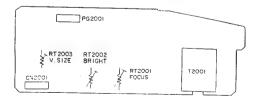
Electrical Adjustment (EVF) Circuit Board (Parts Side)
